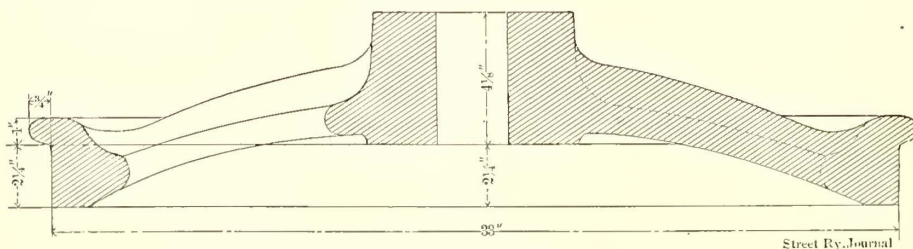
SECTION FROM NORTH JERSEY STREET RAILWAY
